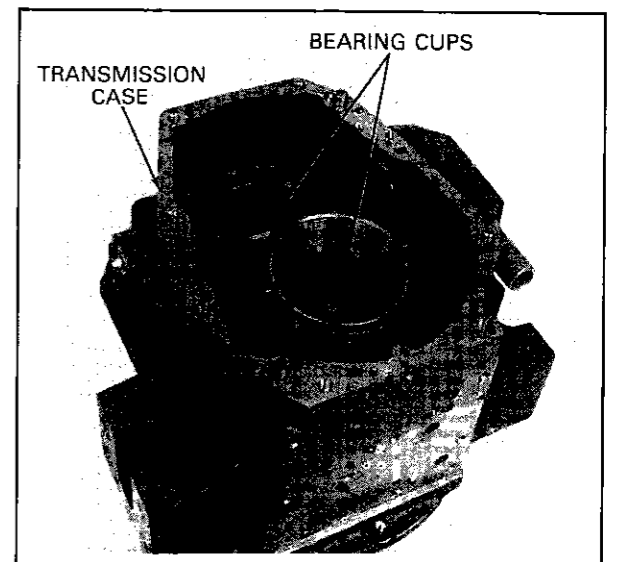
COUNTERSHAFT FRONT CUP INSTALLATION
